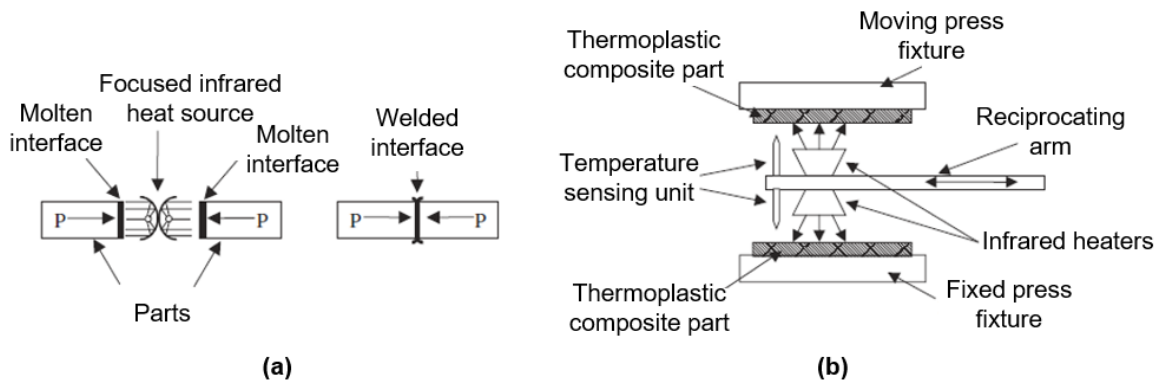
Schematic of the infrared welding technique (a); schematic of the infrared welding machine (b) [108]
